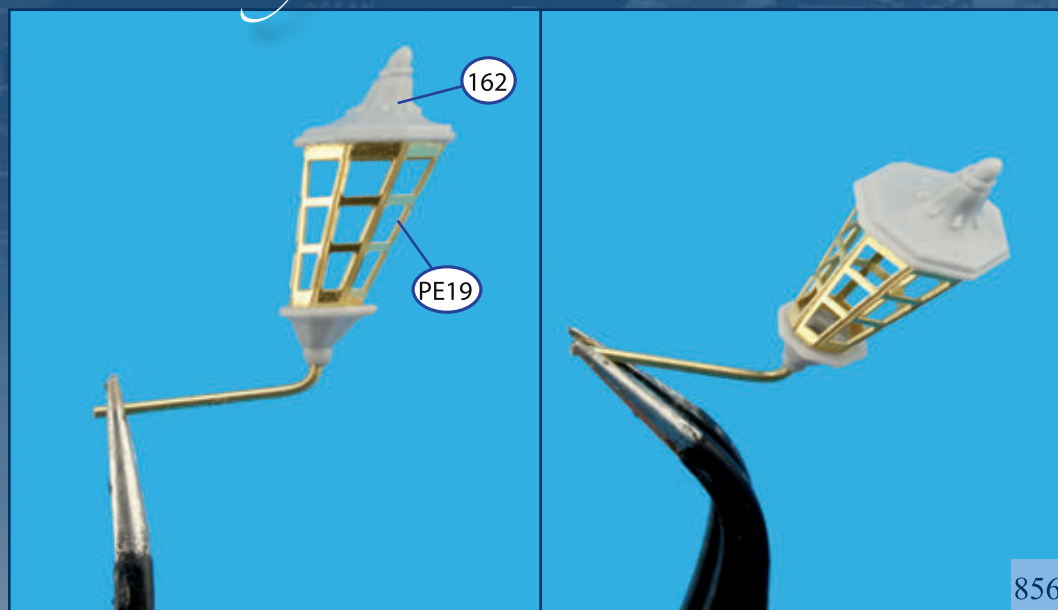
Continue bending the part carefully using the method above until you obtain the lantern structure.
